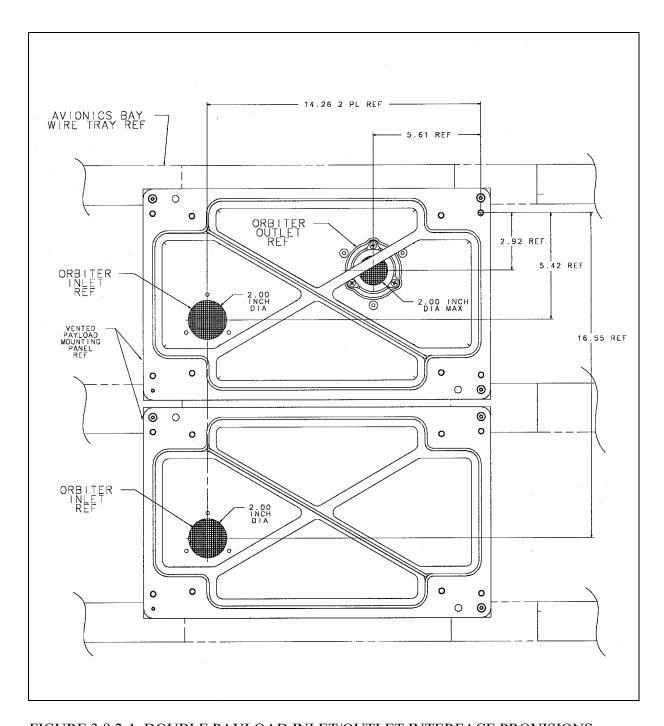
DOUBLE PAYLOAD INLET/OUTLET INTERFACE PROVISIONS - TOP HALF OF OUTLET/BOTTOM HALF OF INLET (NO MINIMUM 0.75 INCH RECIRCULATION GAP)
